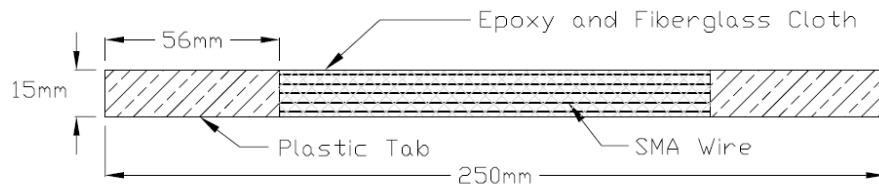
Schematic drawing of an SMA-FRP coupon
